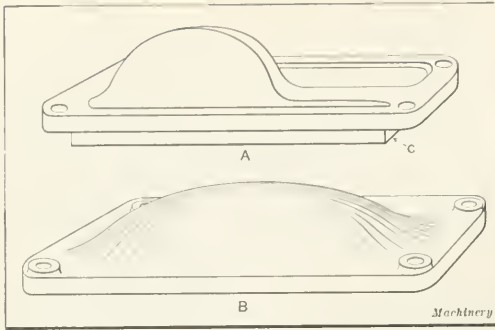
(A) Gear-case Cover requiring Some Machining. (B) Improved Design finished on Disk Grinder except for Drilled Holes
